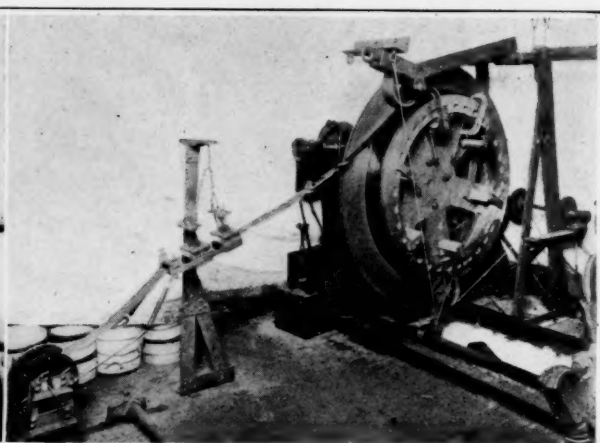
METHOD OF ASSEMBLING THE ARMATURE
